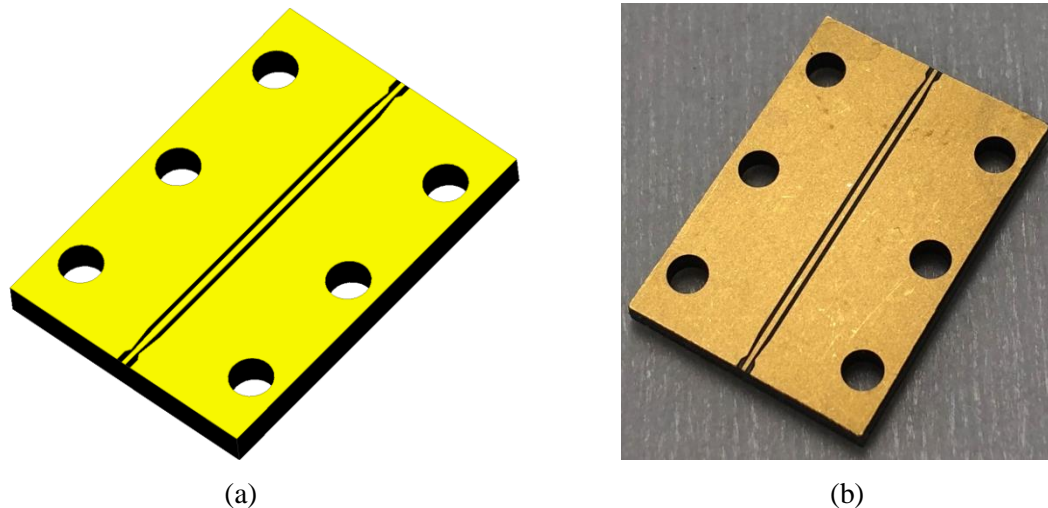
(a) Designed PCB for Photolithography, and (b) the Fabricated One (gold-plated)
